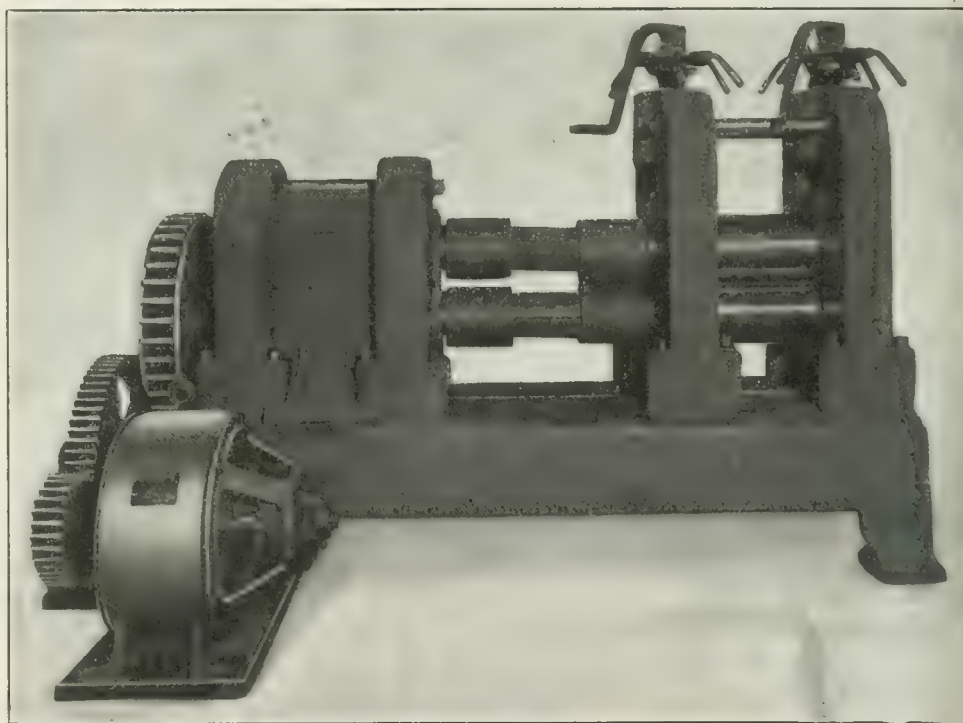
The New Motor Driven Rolling Mill Built by the Standard Mfg. Company, P
